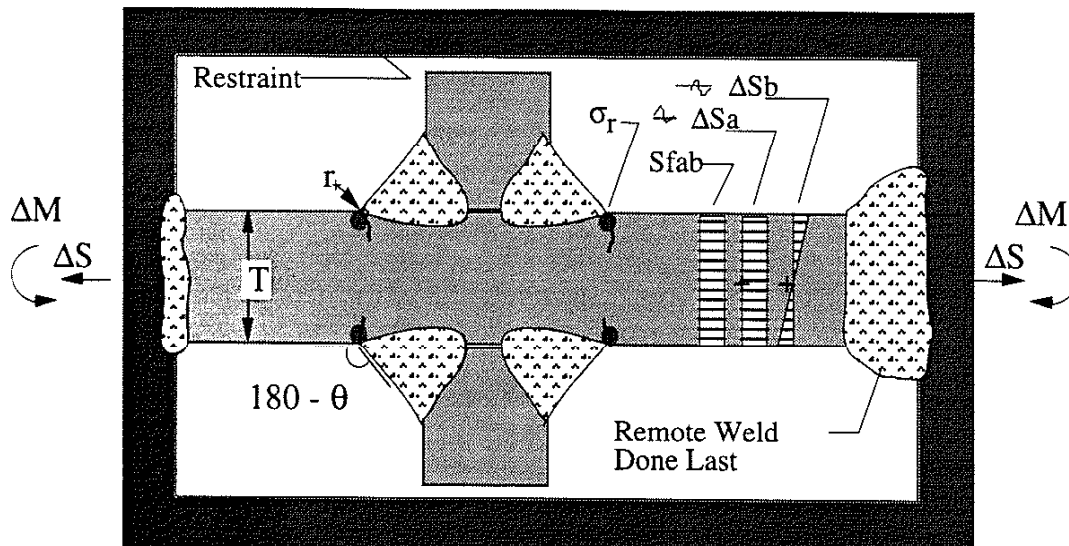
Schematic diagram of a non-load-carrying cruciform weldment subjected to axial and bending loads as well as to global residual (mean) stresses generated by subsequent welding fabrication (S_{fab}). Welding residuals (σ_r) are considered to exist only at in a small volume at the weld toe.
